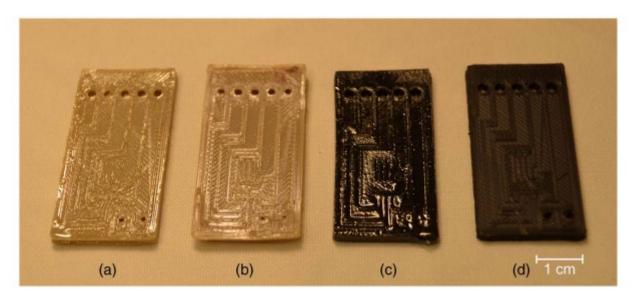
PEEK and ABS parts used in the outgassing test taken after the test runs: (a) coated PEEK; (b) uncoated PEEK; (c) coated ABS; and (d) uncoated ABS. The coating system comprised of epoxy impregnation (thickness > 1 μ m), followed by ALD Al2O3 overcoat (thickness approximately 95 nm). The PC and ND-PLA parts were similar.
